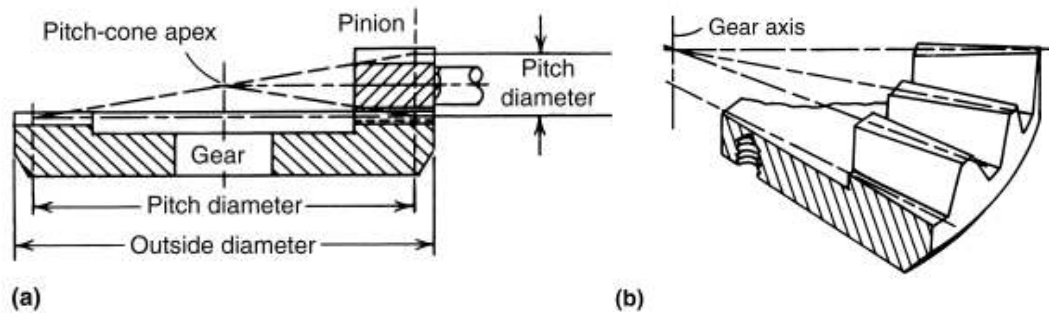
Face gear terminology. (a) Cross-sectional view showing gear and pinion positions. (b) Relationship of gear teeth to gear axis
